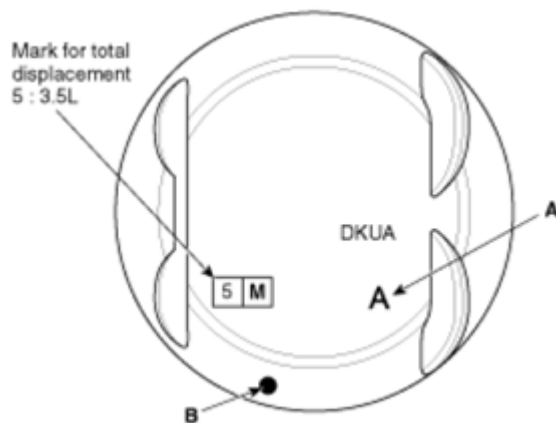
Identifying Piston Size Code And Piston Top Face Mark
